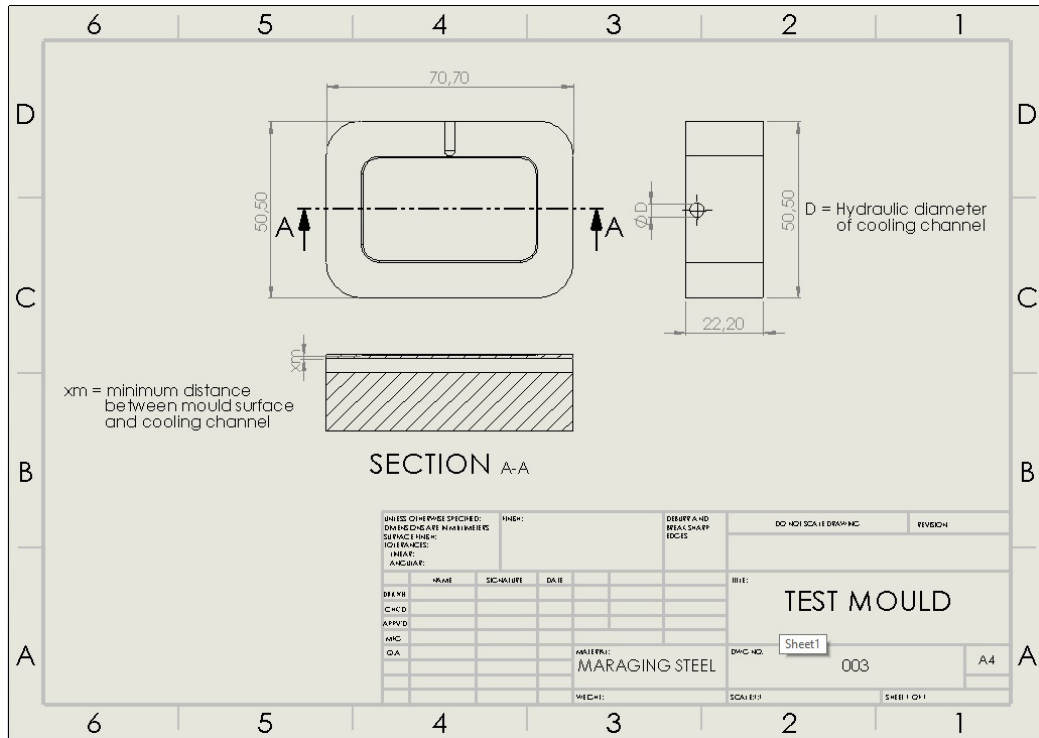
CAD draft showing the dimensions of the mould strength test inserts
